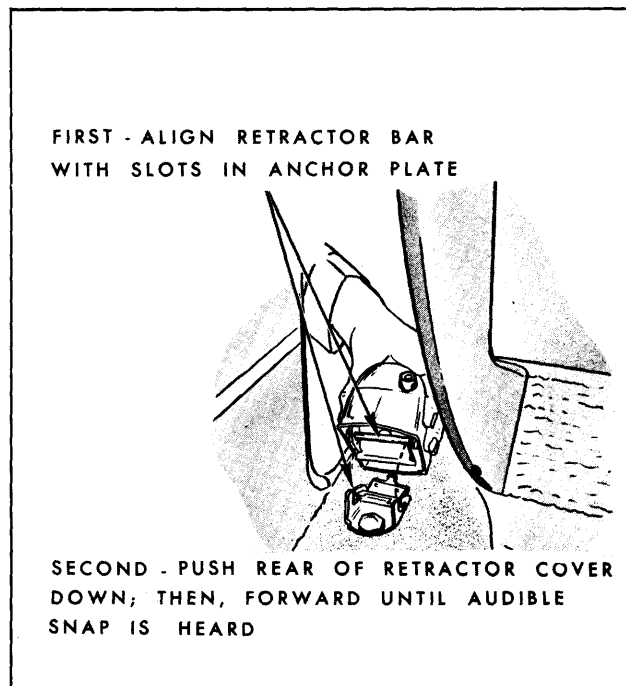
Front Seat Belt Self-Locking Retractor - Installation
